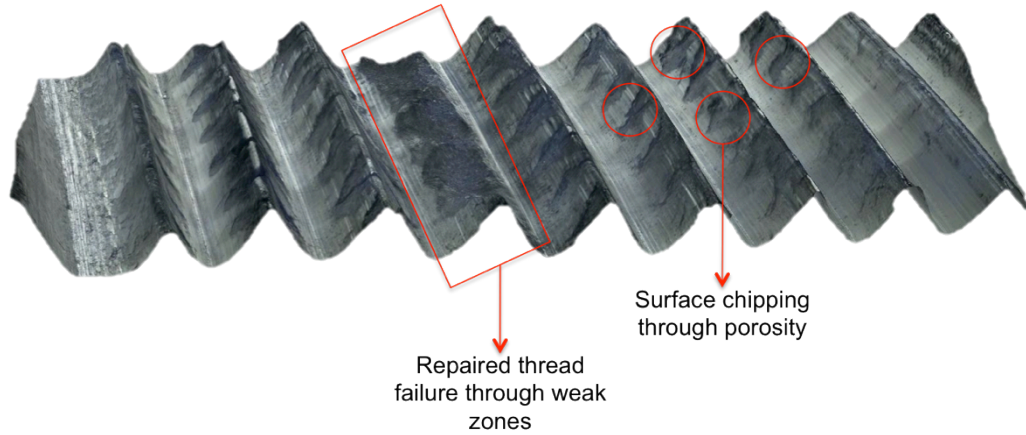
Pure aluminum threads machinability. Chipping of the coating is seen on the threads.
